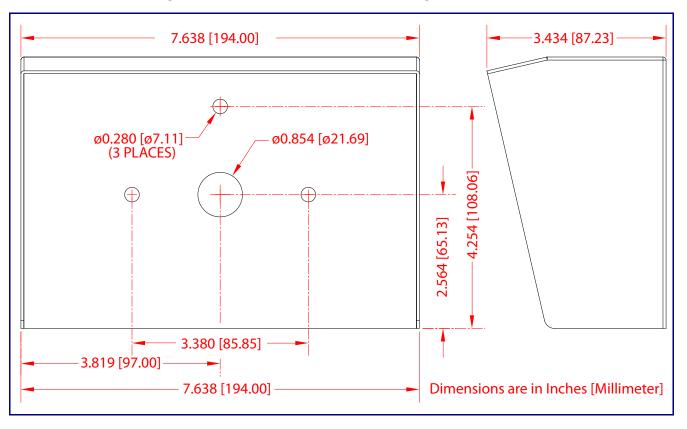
Shroud Dimensions and Mounting Hole Locations
